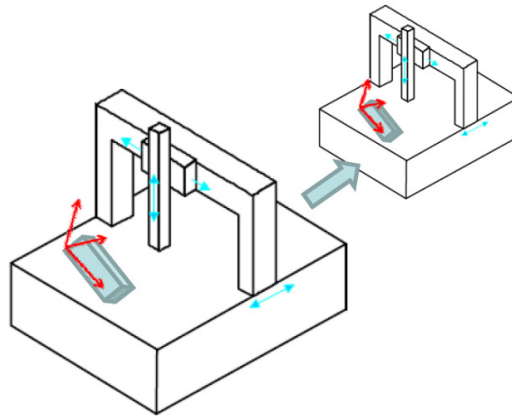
Workpiece coordinate reference system transfer for processing (i.e. machining) on two different machines [Esmoris, 2011].
